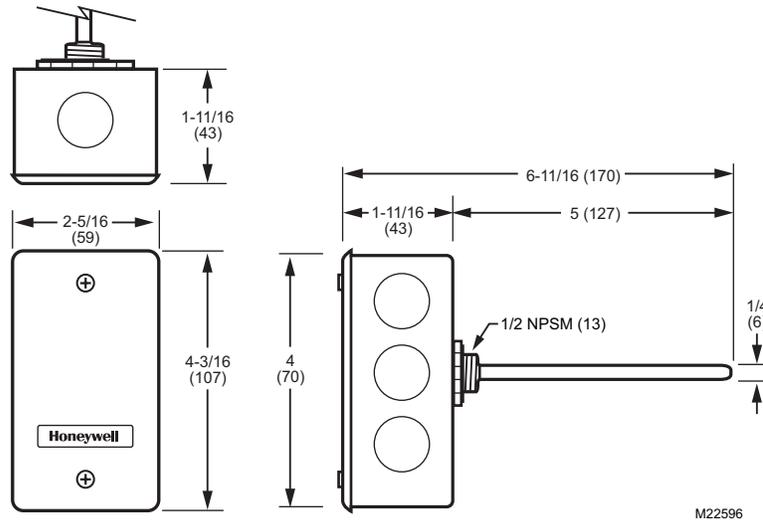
C7021D, C7023D, C7031D, C7041D dimensions in in. (mm)
